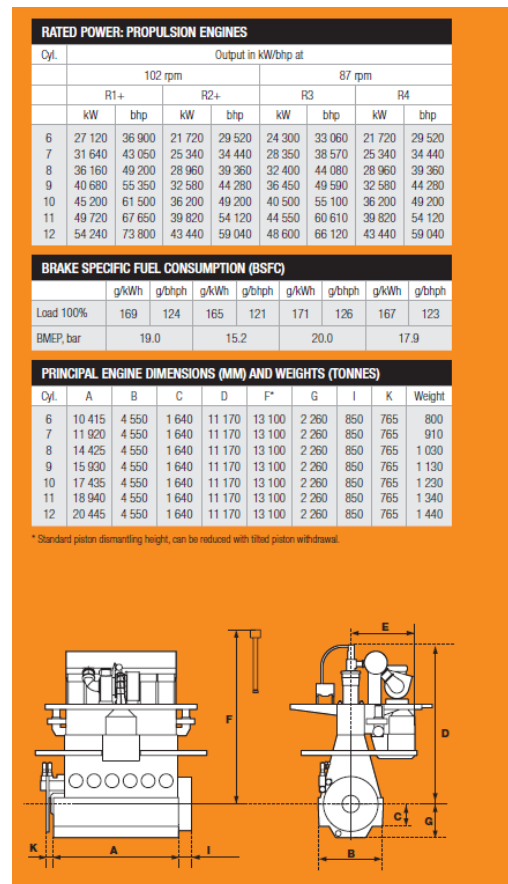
Wärtsilä (Sulzer) 12RT-Flex82C principal engine dimensions and weights
